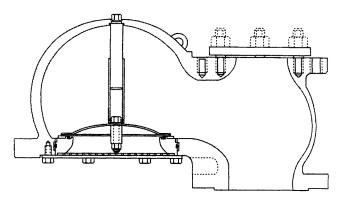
A typical vacuum break valve Courtesy of Tyco Flow Control
